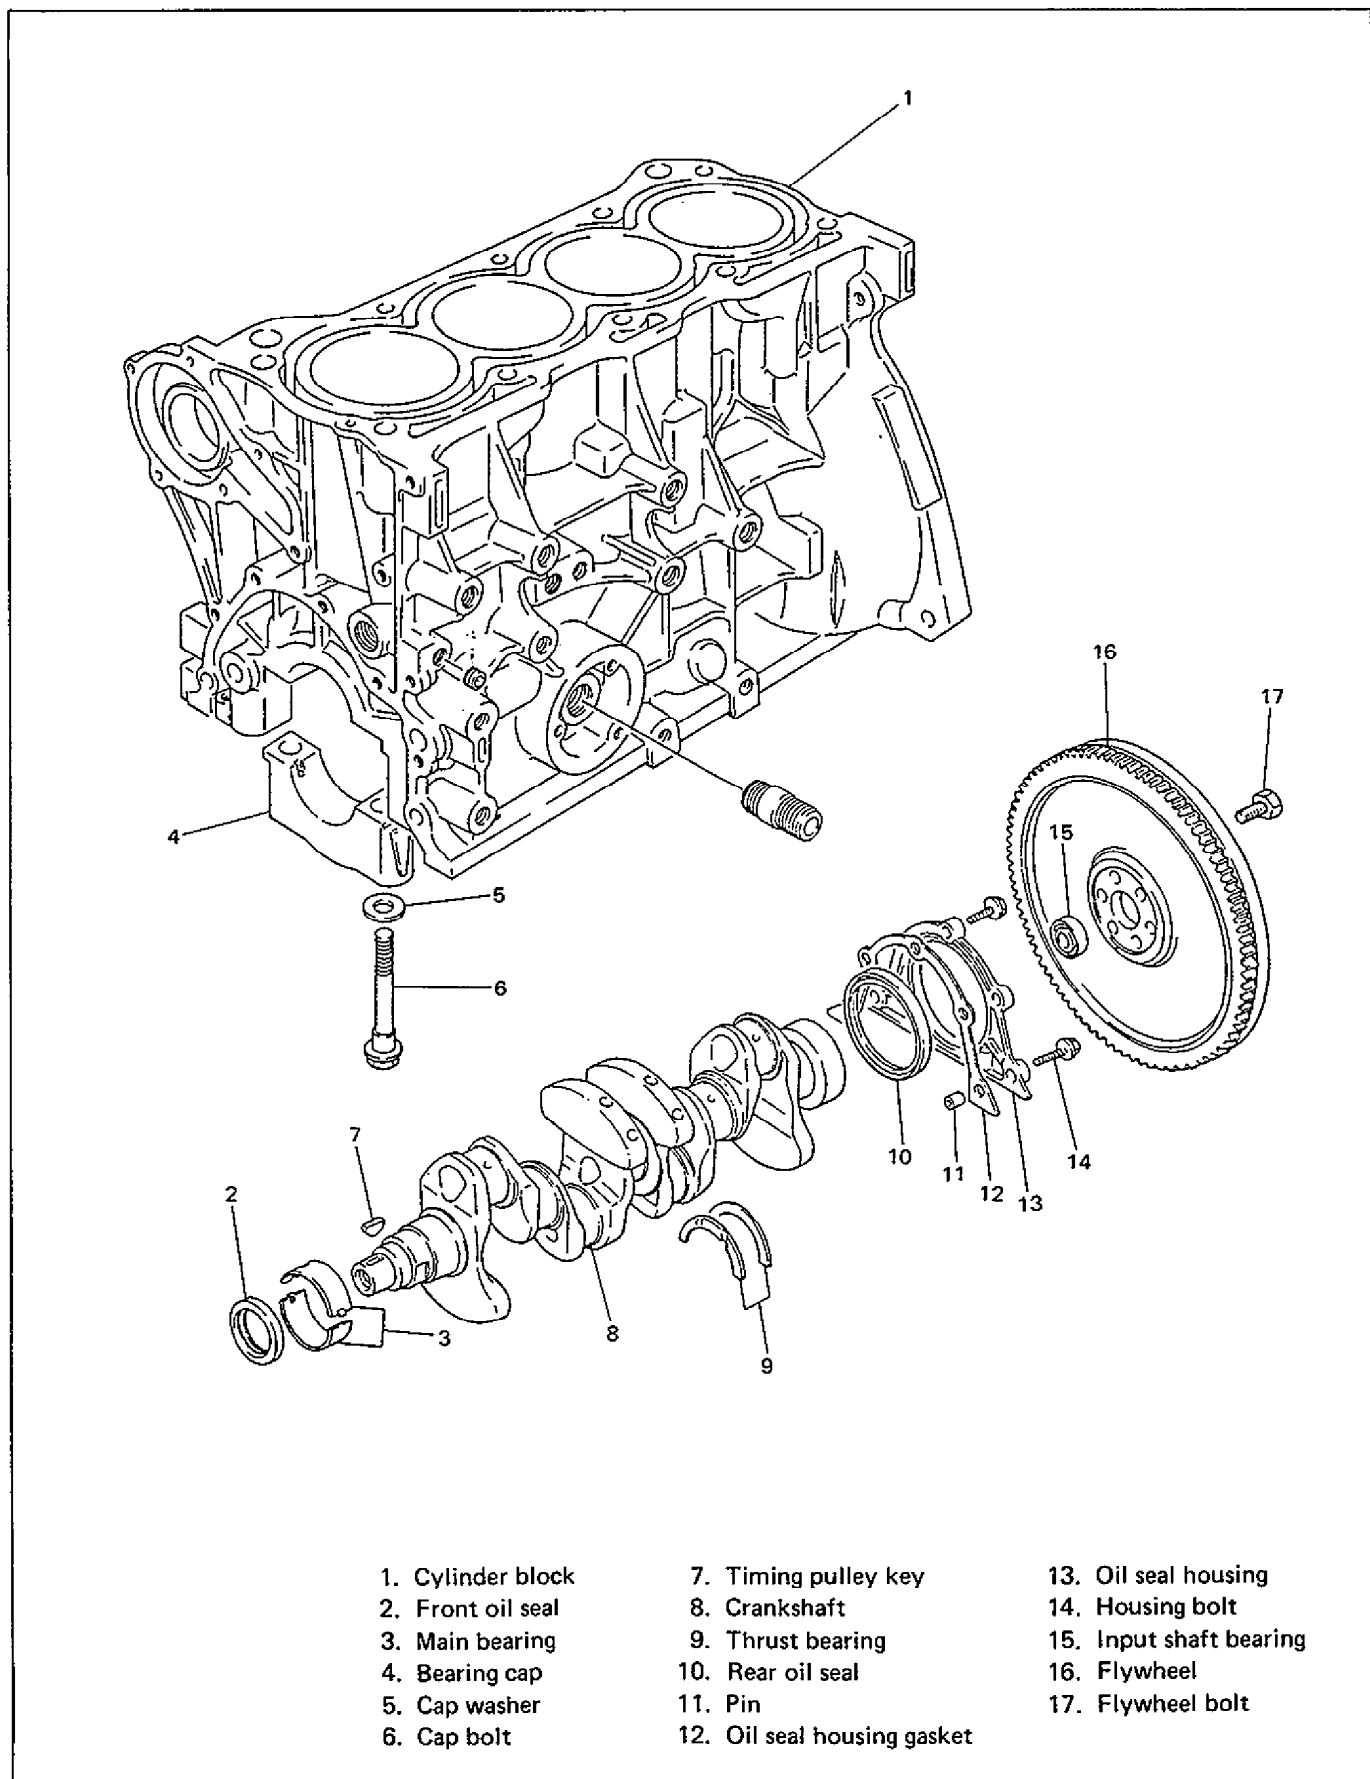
A-134 Main Bearing, Crankshaft and Cylinder Block
